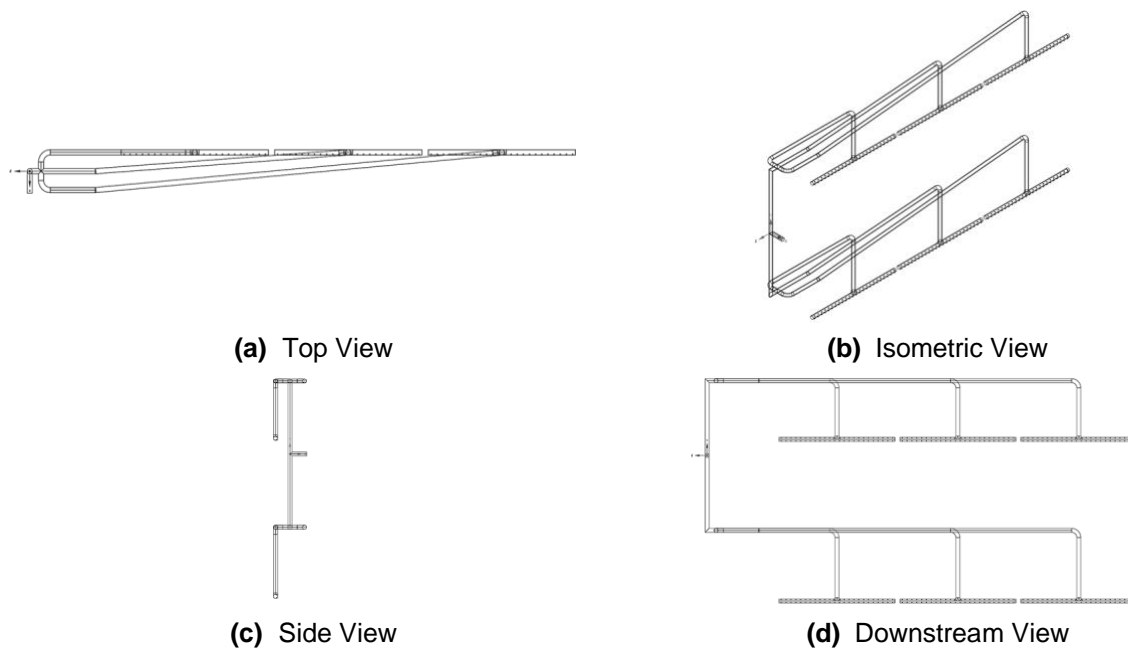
The top (a), isometric (b), side (c), and downstream (d) view of the zone 1 injection manifold is shown.
